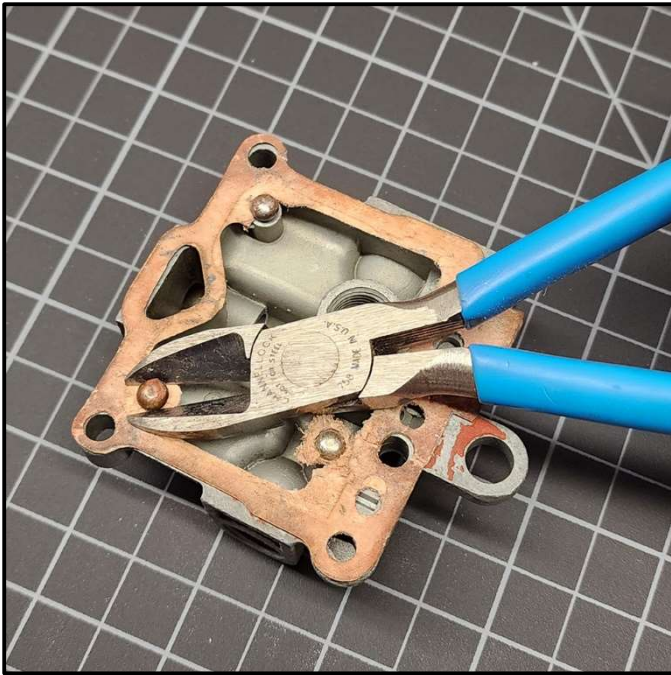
Side cutters grasping under the head of the hammer drive screw.
